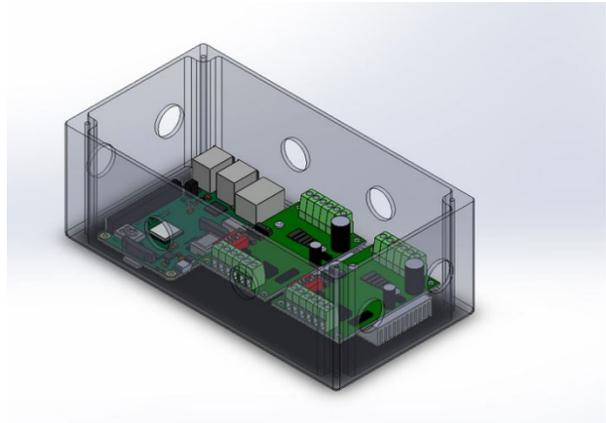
Enclosure with Raspberry Pi and motor Controllers
